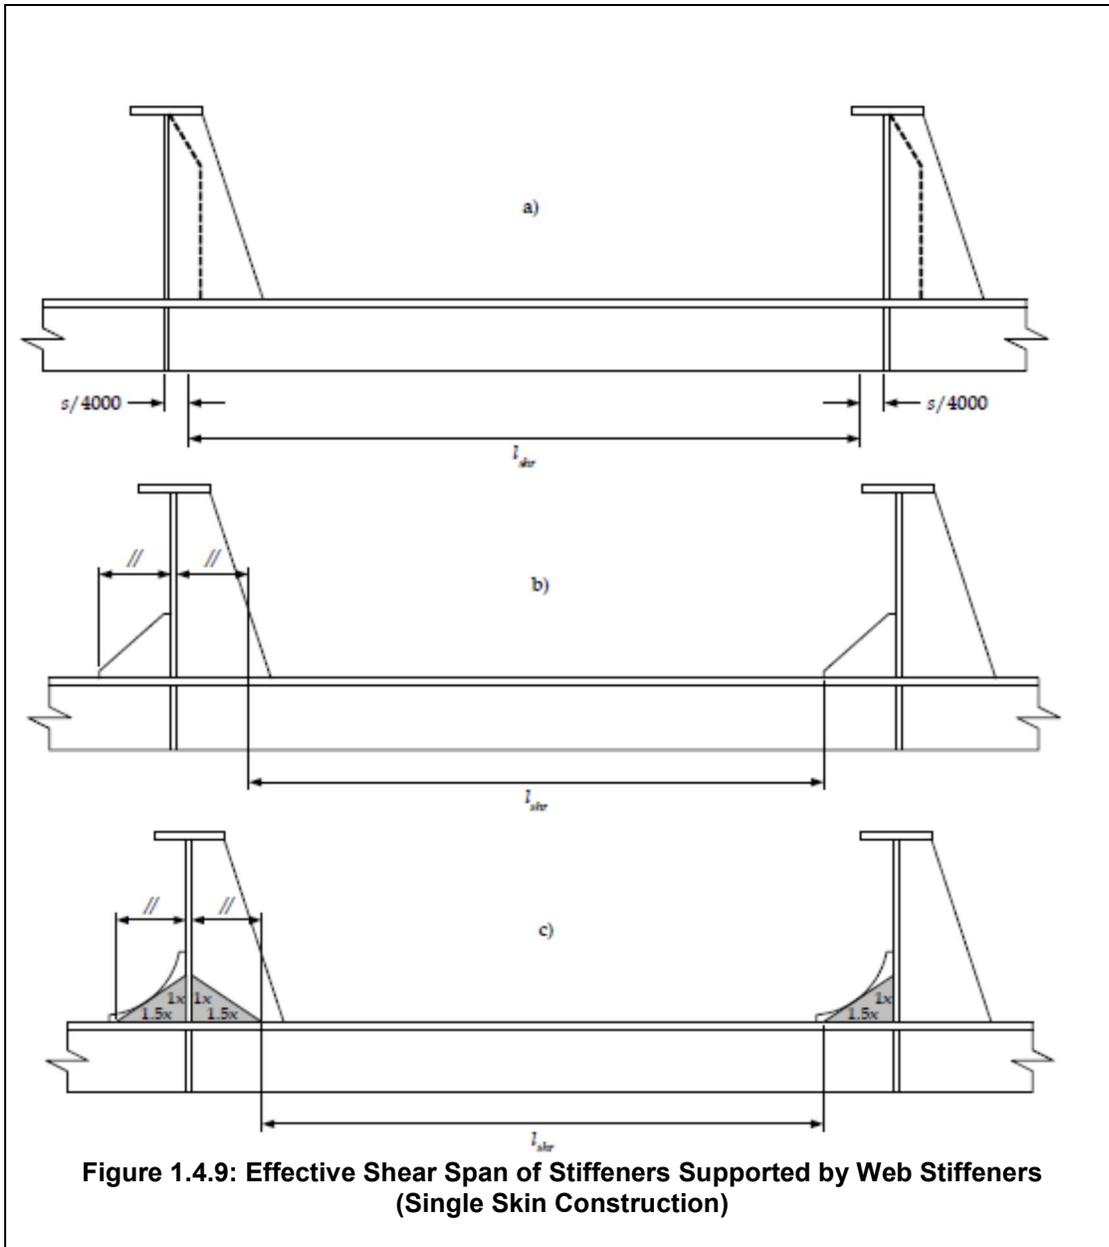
Effective Shear Span of Stiffeners Supported by Web Stiffeners (Single Skin Construction)
